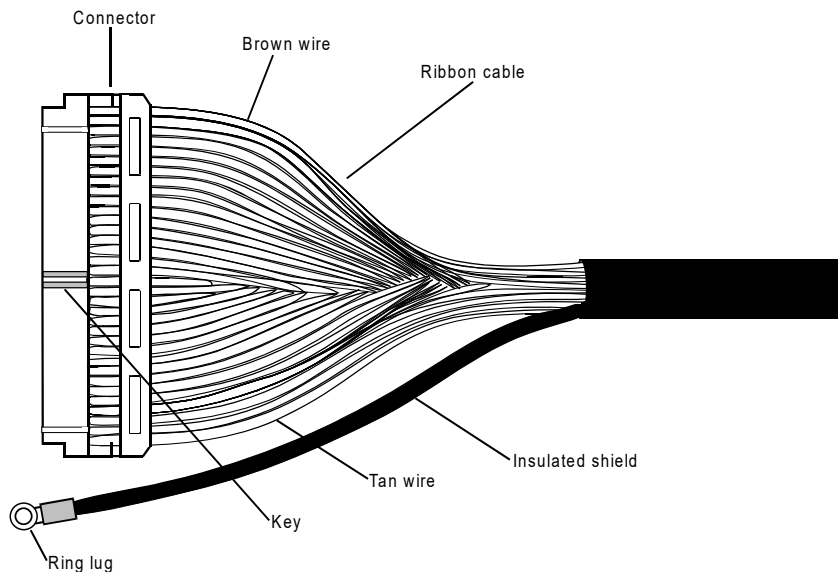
Ribbon Cable with Connector and Insulated Shield
